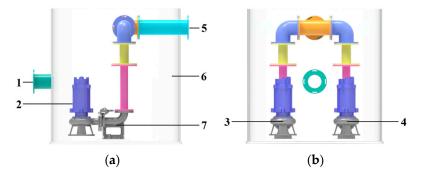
The 3D model structure of centrifugal prefabricated pumping station: 1. Inlet; 2. Motor; 3. Submersible centrifugal pump A; 4. Submersible centrifugal pump B; 5. Outlet; 6. Prefabricated barrel; 7. Coupler. (a) Side view. (b) Front view.
